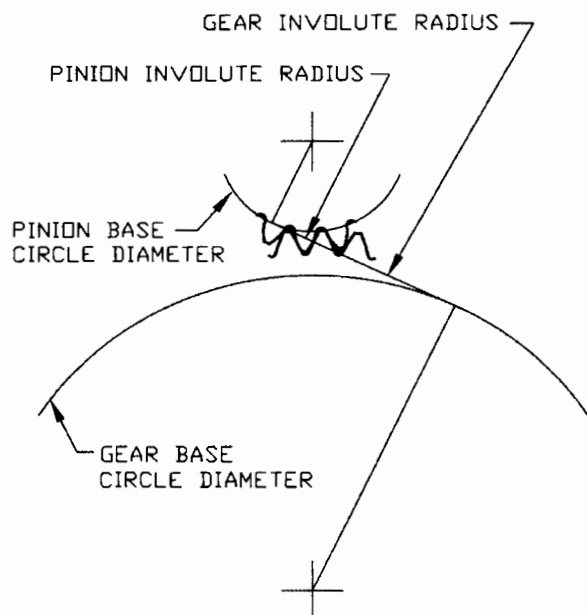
AGMA 25° PRESSURE ANGLE GEARS
